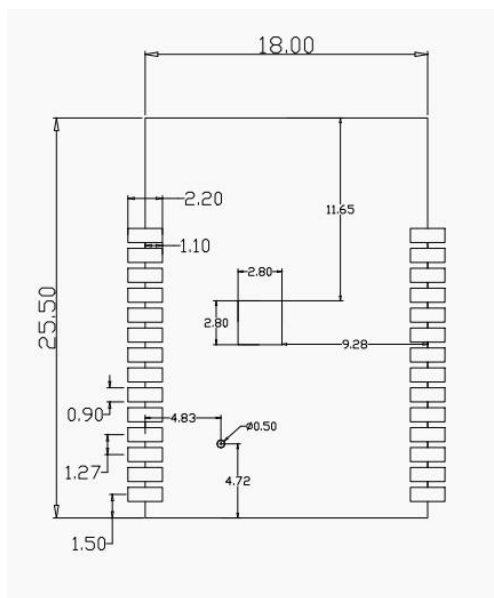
Recommended PCB Footprint Dimensions (Unit: mm)
